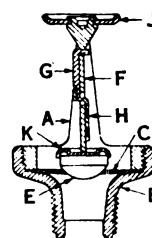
CROSS-SECTION OF SPRINKLER HEAD
